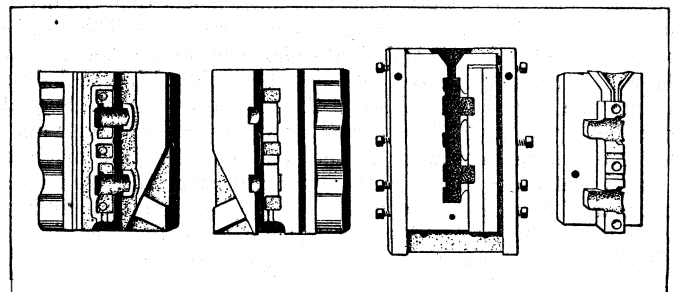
FORGING AND TRIMMING DIES FOR A CROSSHEAD SUPPORT FORGING
